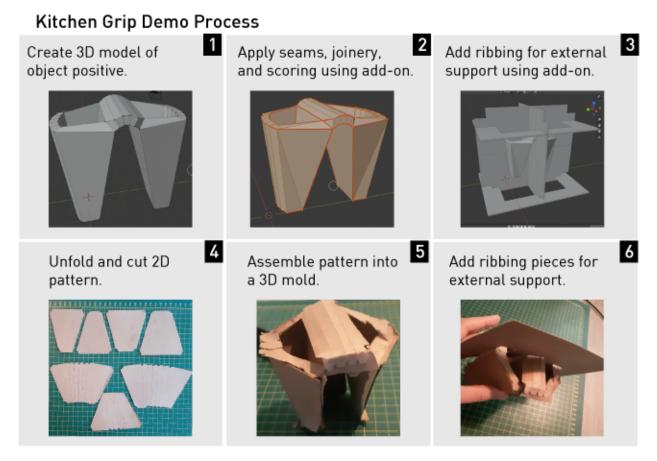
Our demonstration of the FoldMold Blender Add-on for creating a kitchen grip mold, showing the process from 3D model to a physical mold.
